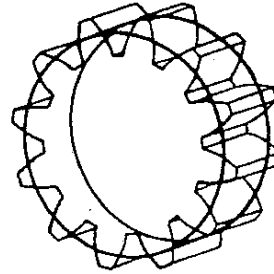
Reference cylinder of a cylindrical gear, reference cone of a bevel gear
